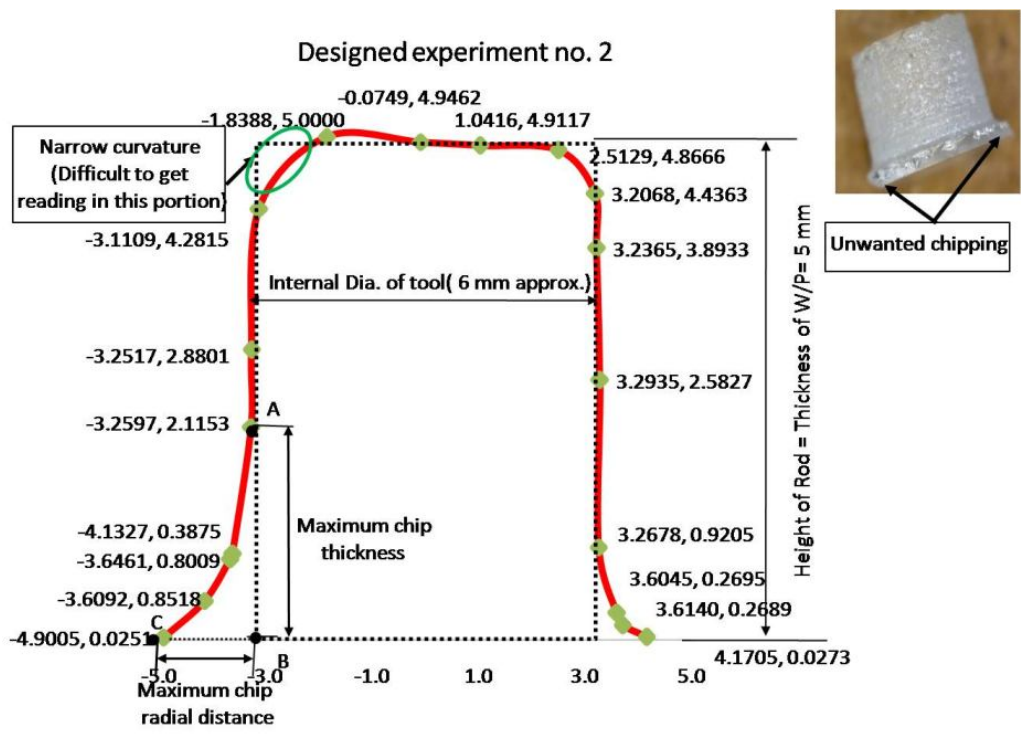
CMM image: Machined rod generated by hollow diamond coated abrasive tool
